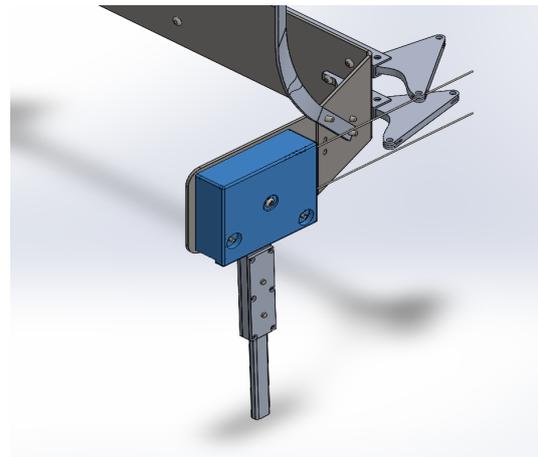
In blue: PLA printed cap covering the rotating parts of the hip joint.
